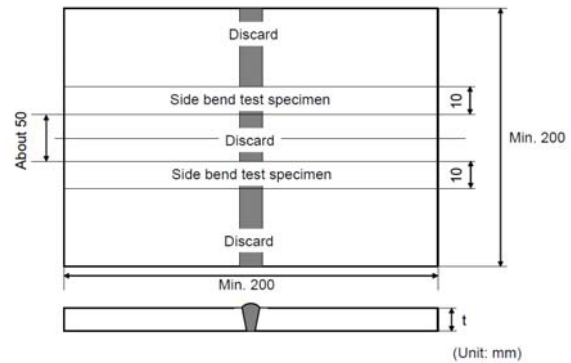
Dimensions and types of test assembly for butt welds ($T \geq 12\text{mm}$)
